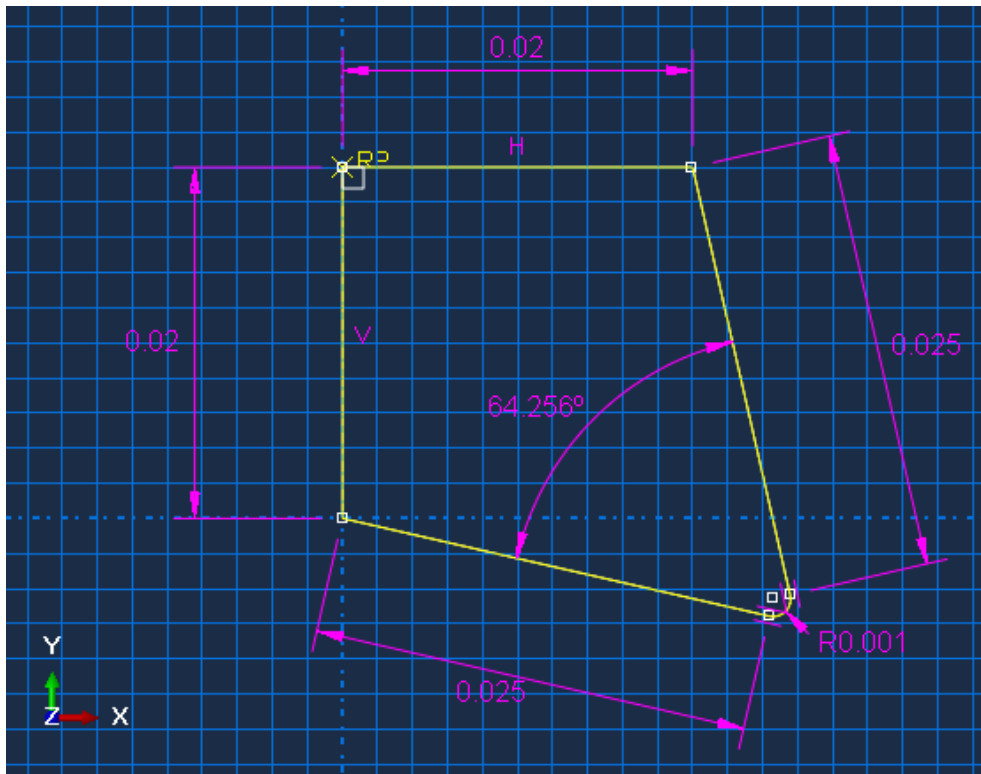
Sketch made on Abaqus of the cutting tool with edge radius $1 \mu\text{m}$. The dimensions on the sketch are in millimeters.
